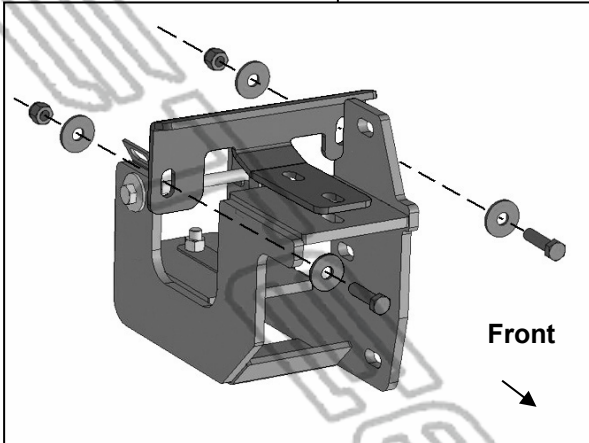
Insert "U" Bracket Spacers between side of frame and inside of Frame Bracket (driver/left side Bracket illustrated)
